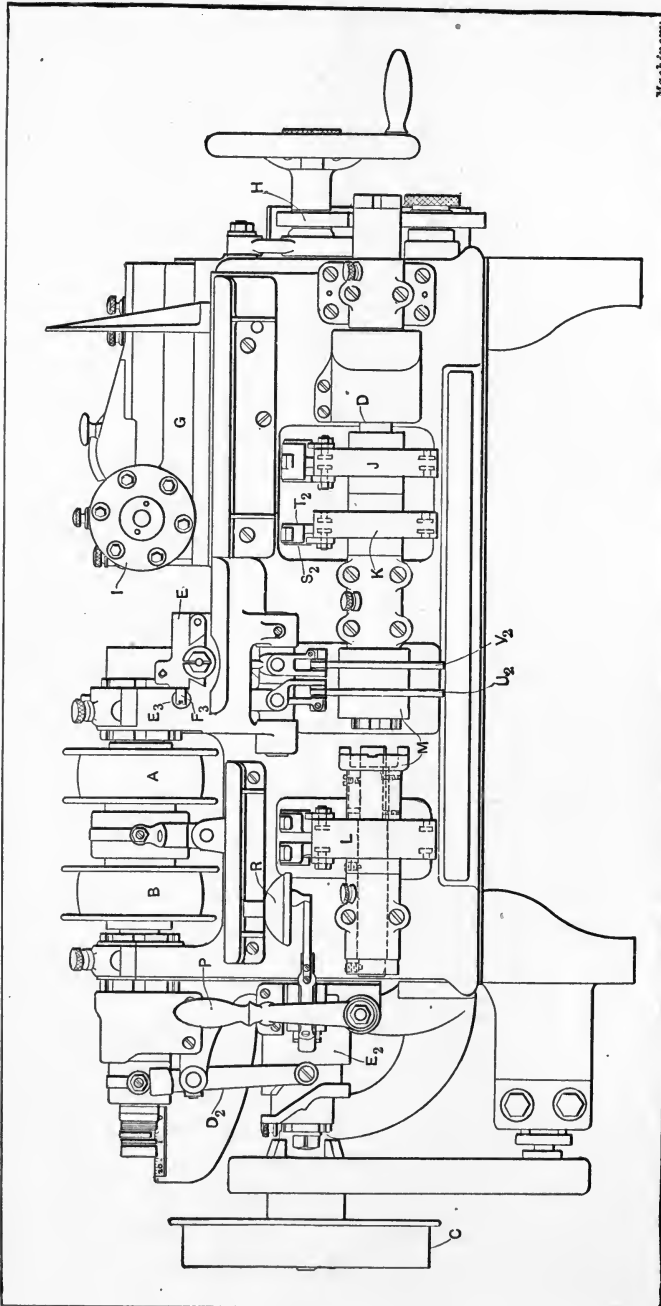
Front Elevation of the No. 00 Brown & Sharpe Automatic Screw Machine
